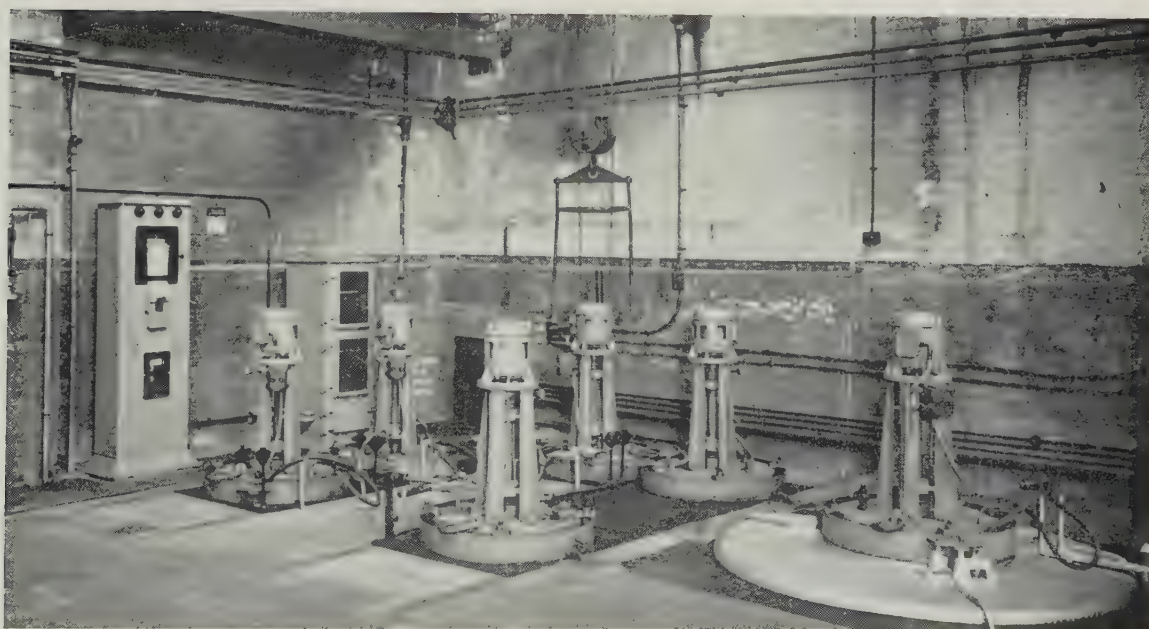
Pit Furnace for Bright Annealing Silver-Clad Copper Sheet in Coil Form.
